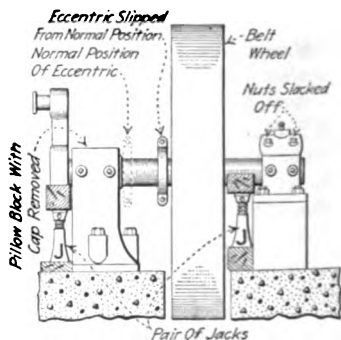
Main shaft jacked up to permit removal of bottom bearing shell.
